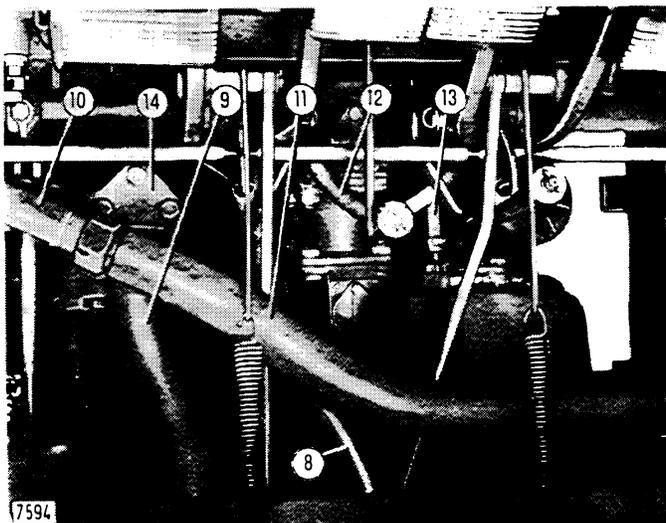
Top View of the Torque Converter/Gearbox Assembly
